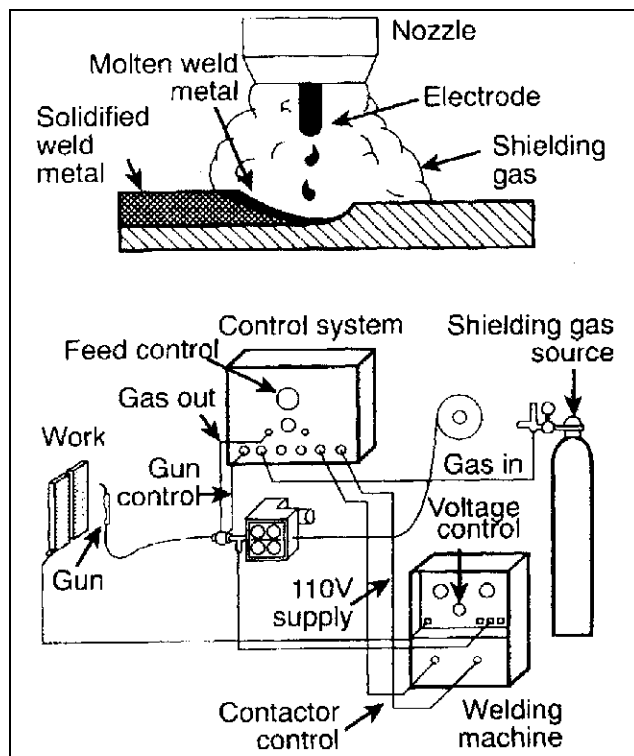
The basic components of the Gas Metal Arc Weld (GMAW) process
